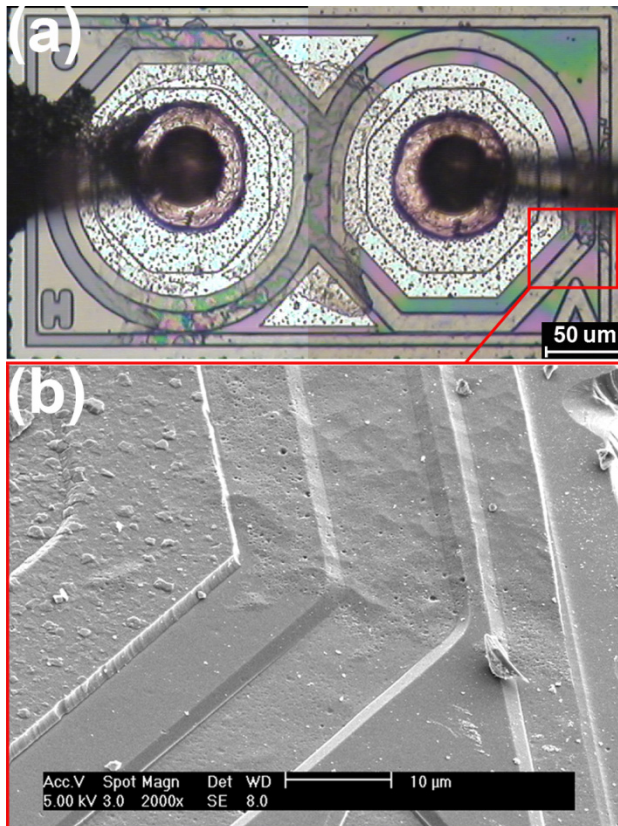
(a) Si_3N_4 passivation partly removed due to a not thick enough blocking layer of molding compound less than $30\ \mu\text{m}$ thick; (b) SEM image showing the partly removed Si_3N_4 layer.
